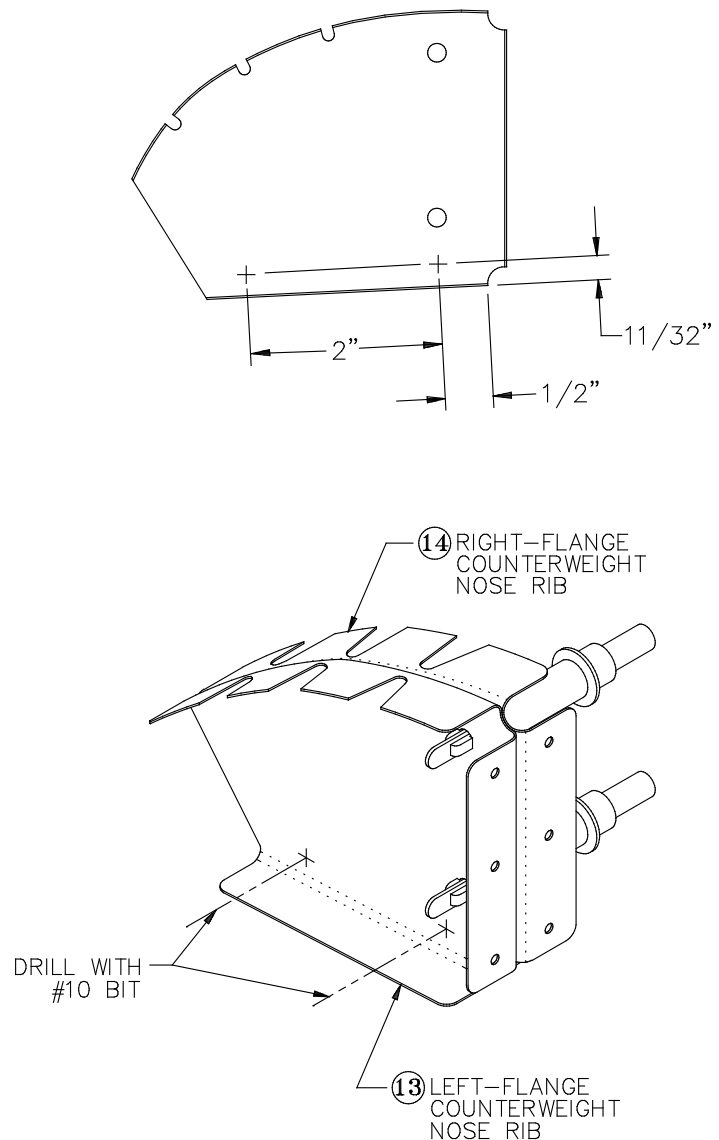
Marking and Drilling the Counterweight Bolt Holes
